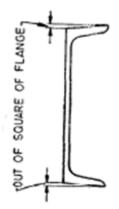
FIG. FLANCES QUT-OF-SQUARE OR OUT-OF-PARALLEL
